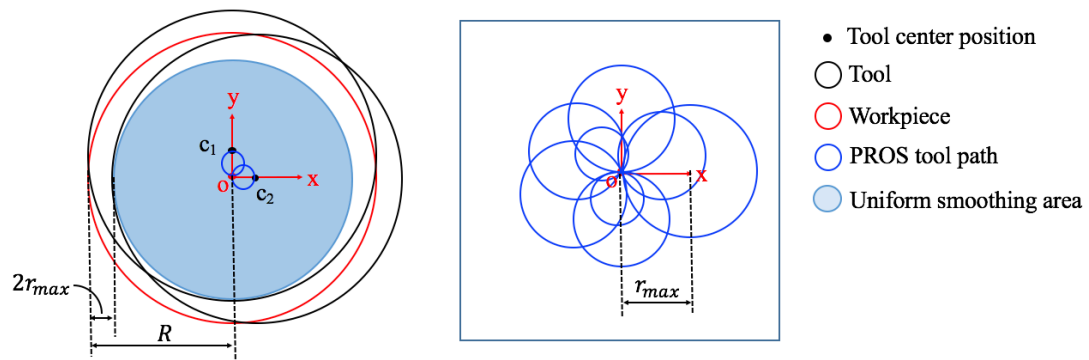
Schematic showing the geometrical relationship between the workpiece and tool (left) and the PROS tool path generated using the CNC machine control software (right).
